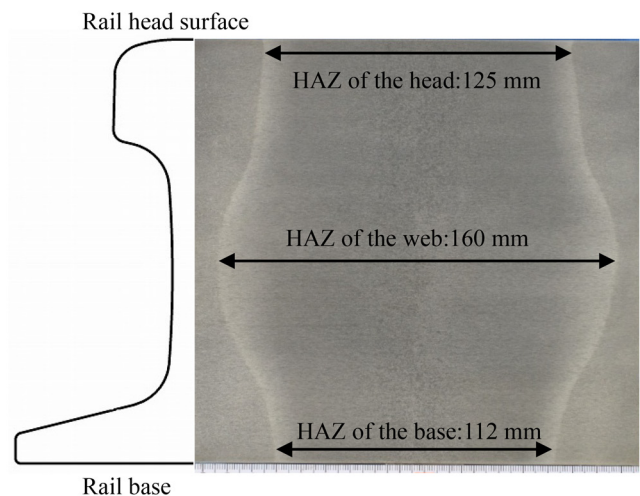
Macrostructure of etched gas pressure weld
